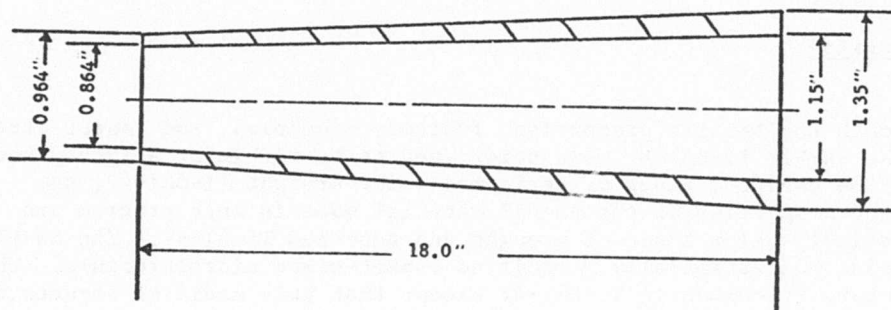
As-HIP and Machine-Tapered Ti-6Al-4V Preforms for Direct Mechanical Testing.
